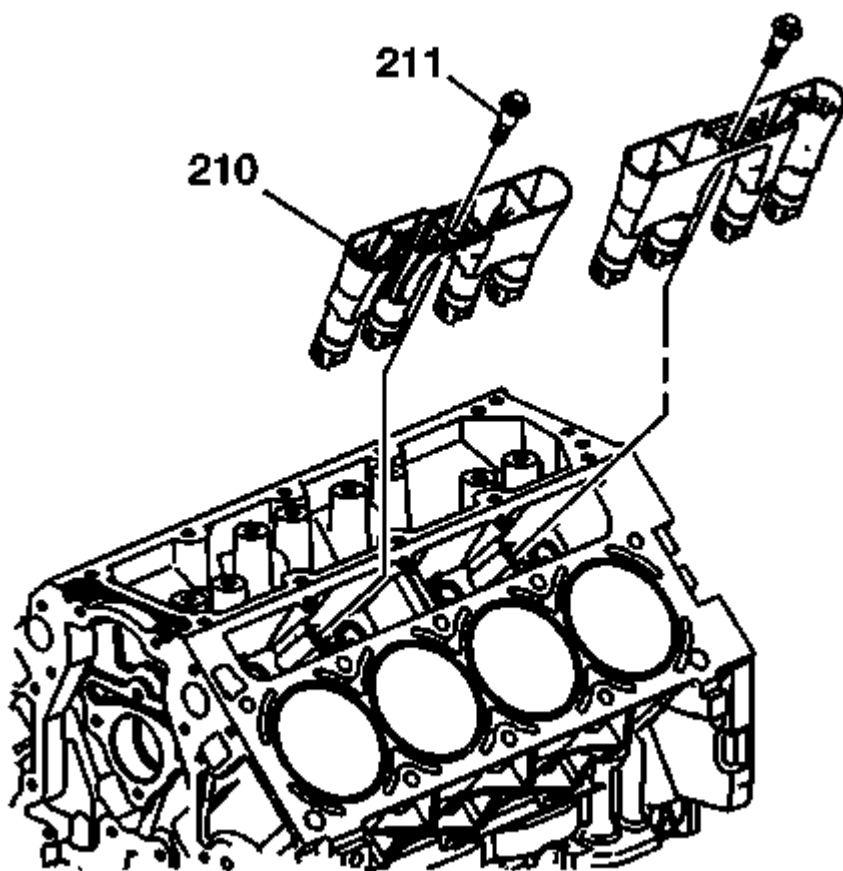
Valve Lifter Guides, Cylinder Head & Bolts
